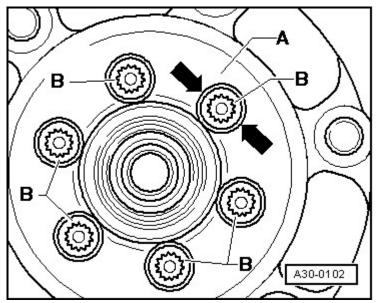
Identifying Dual-Mass Flywheel & Bolts Courtesy of AUDI OF AMERICA, LLC
